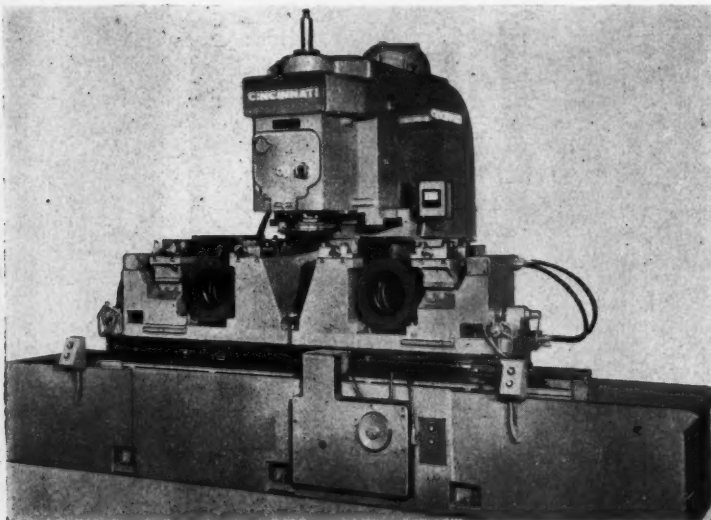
Pendulum milling set-up on a Cincinnati machine for milling flange faces of gate valves with bores from 2 to 10 in. diameter
